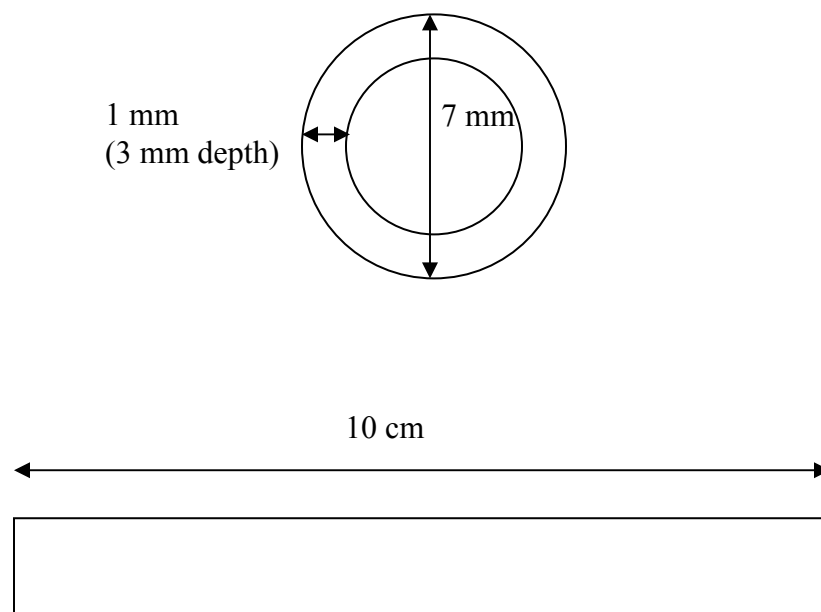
Schematic of samples for uniaxial tensile test of a ring and tube inflation test
